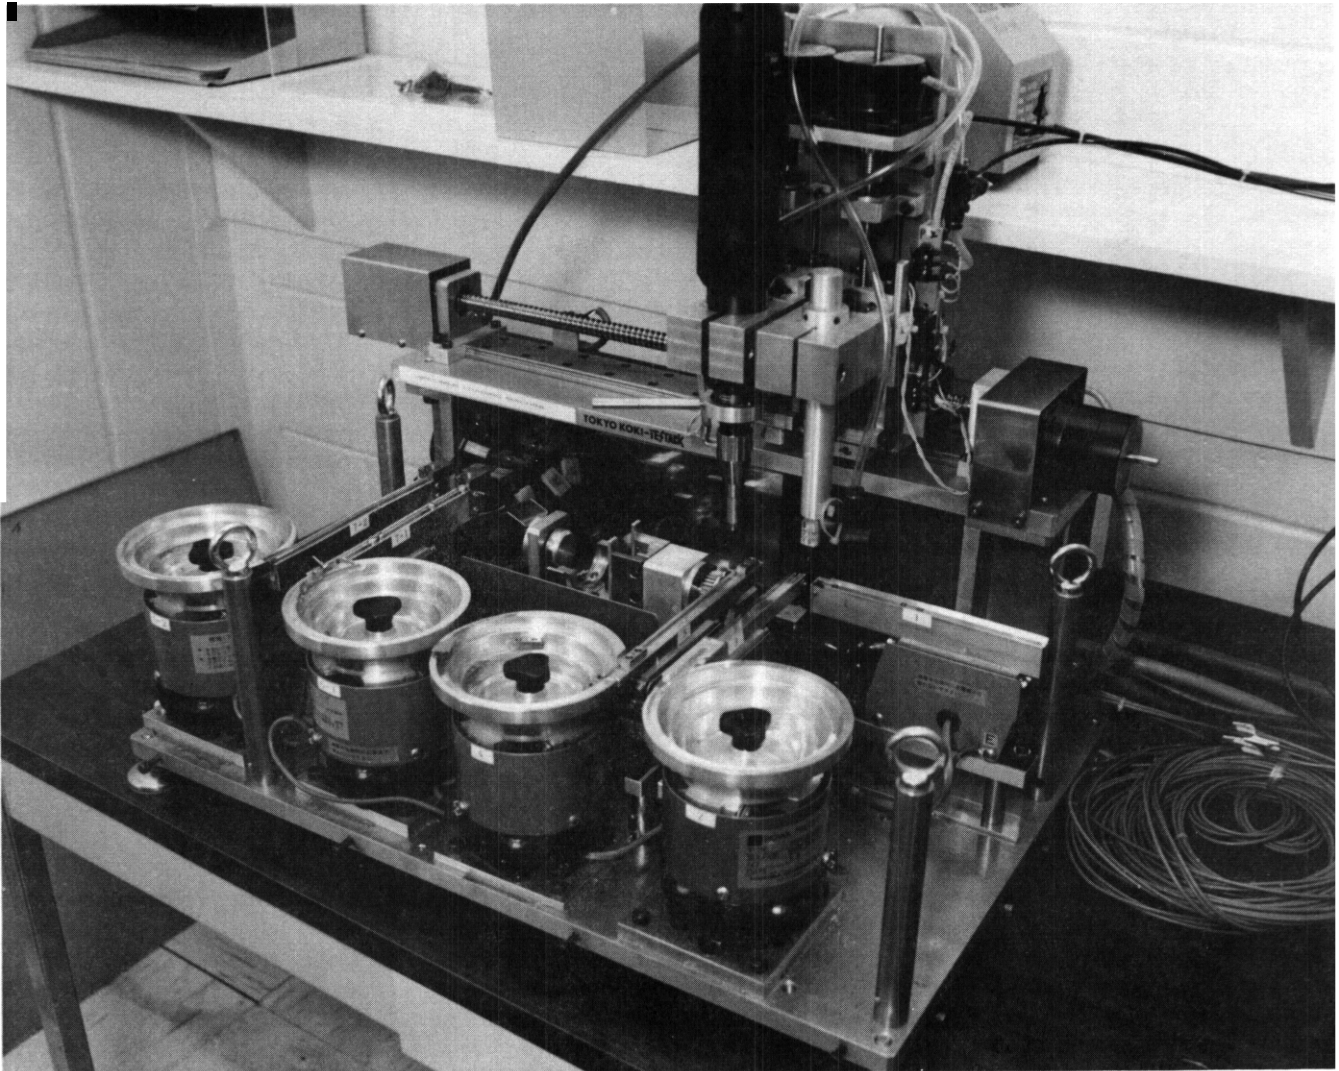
MATRON specimen loading device. The bins at the front of the picture are the feeders from which the various parts of a specimen fixture are loaded.
